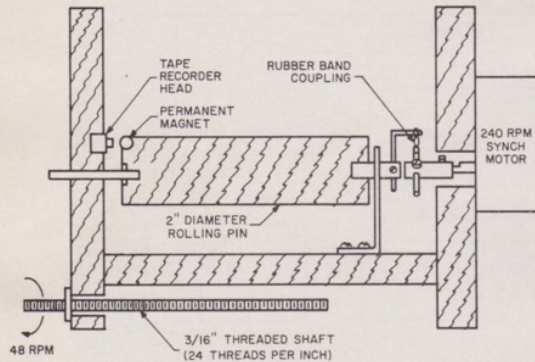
The drum and carriage assembly, showing the synchronizing system using a tape-recorder head and permanent magnet. The carriage is moved along a track by the lead screw for line-by-line scanning.
